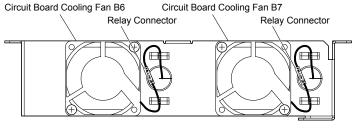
Cooling Fan Wiring: 4A0414 to 4A0590
